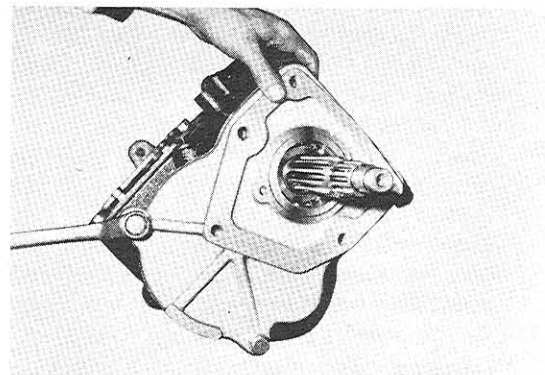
Removing Rear V5064 Bearing Retainer
